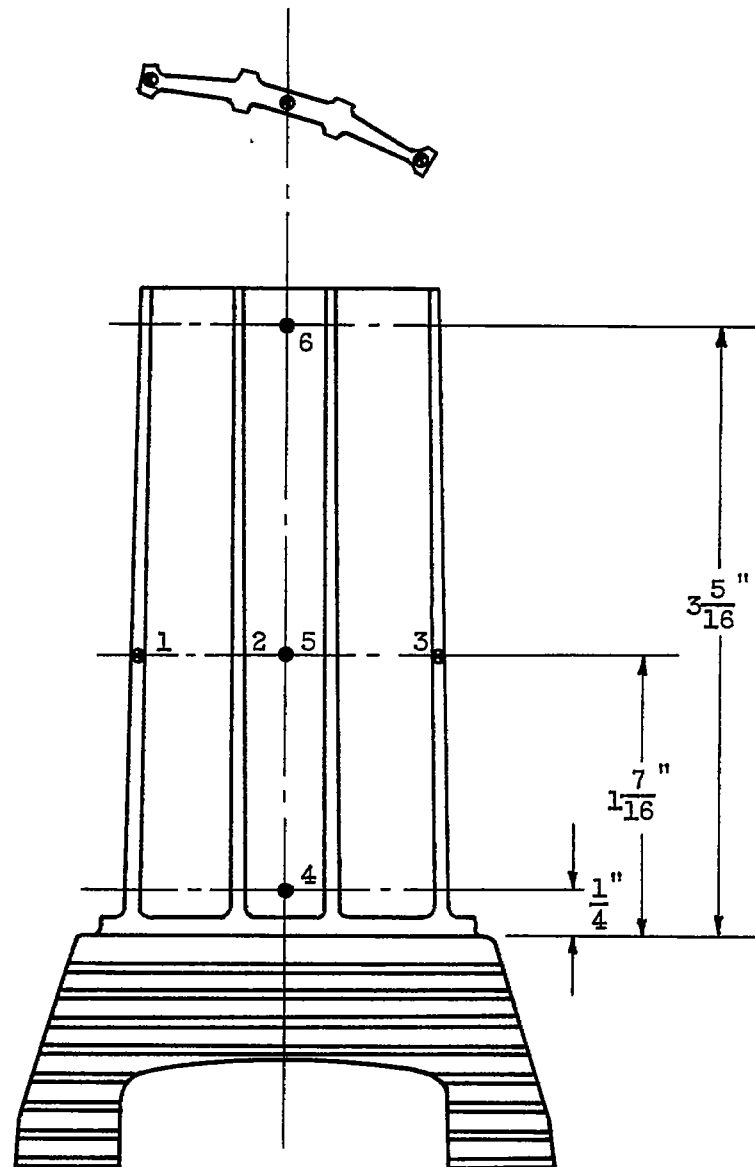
Thermocouple locations for transpiration-cooled blades.
